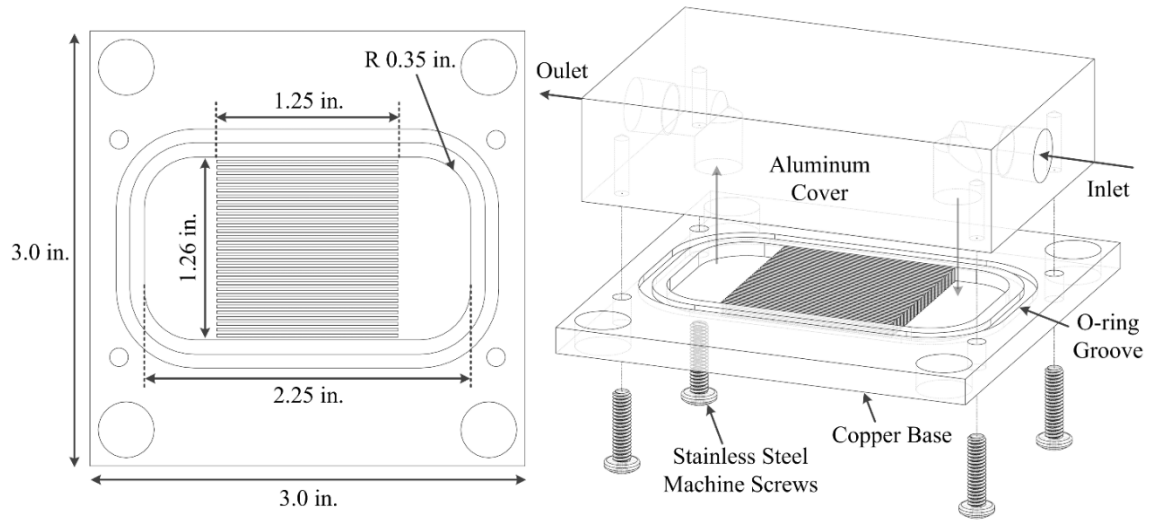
Schematic of the heatsink base and assembly in its exploded configuration
